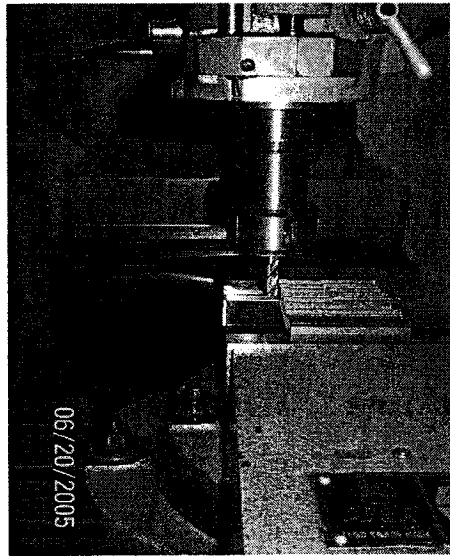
Setting of sensor, cutter, workpiece and slotting
